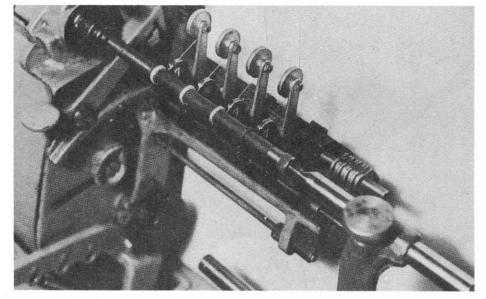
4-coil machine equipped with new type of wire guide. New slots are brought into position by loosening the screw, turning the guide, then tightening the nut. (Note: turning the nut makes tighter fastening than turning the screw.)
